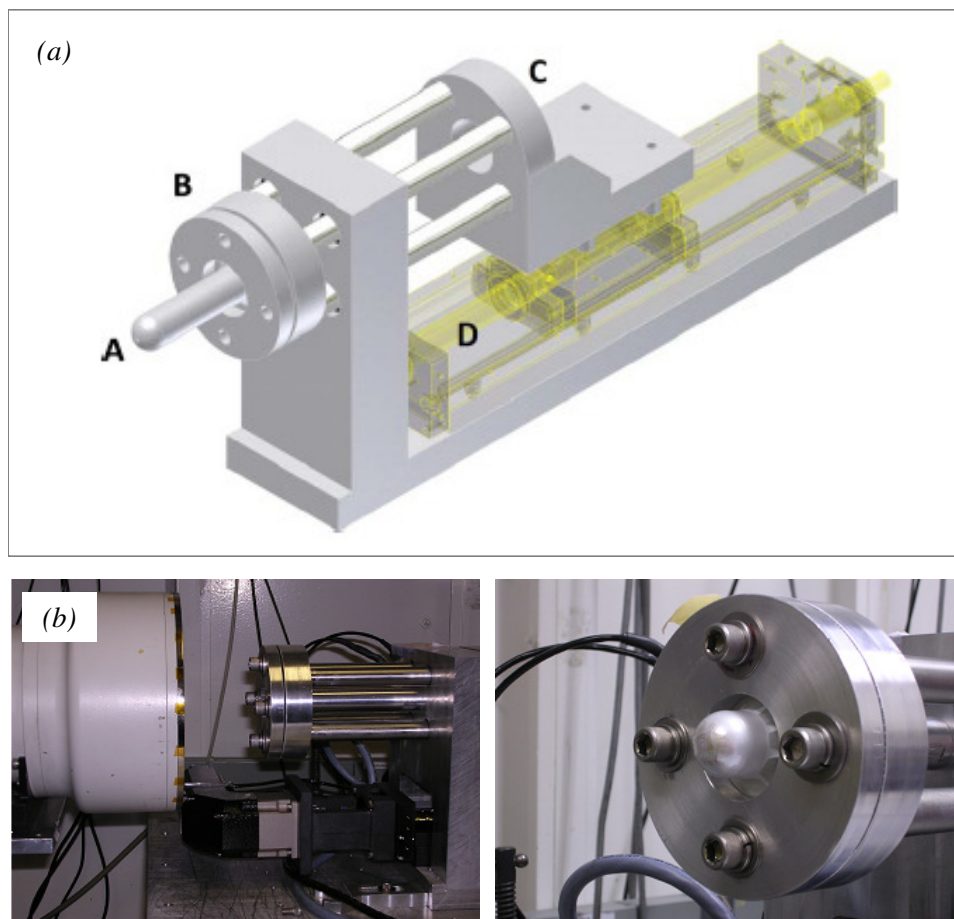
(a) Schematic of the IMDD, showing the nose (A), translating sample clamp (B), translator and pull rods (C), and linear motor screw thread (D). The linear motor driving the screw thread is not shown, but is mounted at the front of the IMDD to reduce the foot print of the device, and (b) A picture of the device.
